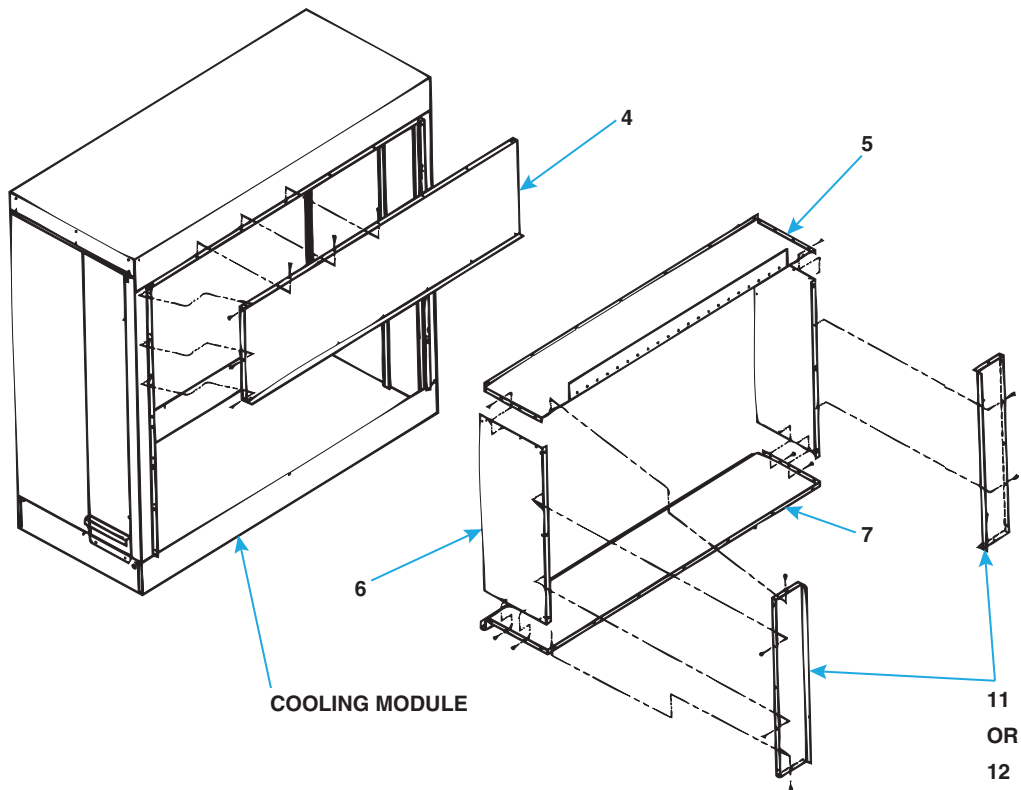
Evaporative Cooling Module and Transition Duct (Refer to [Table 1](#))
